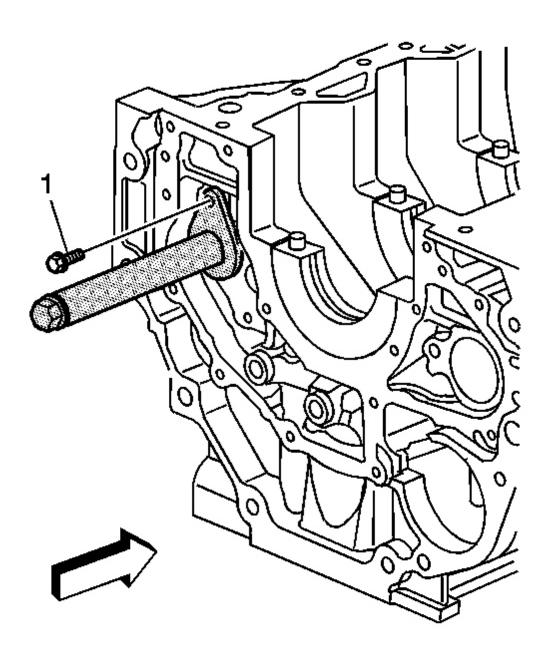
Removing Right Balance Shaft Mounting Bolt Courtesy of GENERAL MOTORS CORP.
